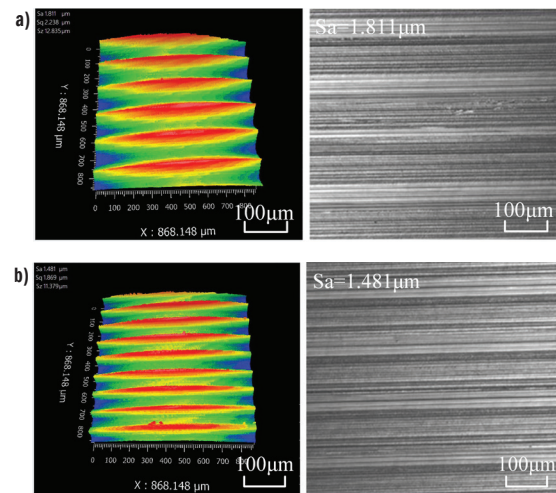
Comparison of surface morphology before and after lubrication; a) 3D surface topography and profile of the workpiece in dry cutting; and b) 3D surface topography and profile of the workpiece under lubricated conditions
